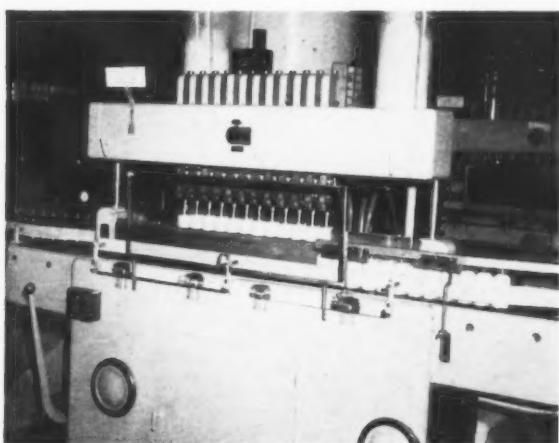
Illustrated is the 12 station machine. Containers from a chute are fed by a star wheel onto turrets. As the upper part of the machine rotates, cams lift the turrets and containers against the rubber seal of the filling head. This contact opens the valve sleeve. As the material flows into the container from the filler bowl, air escapes through a tube in the middle of the valve assembly. Flow stops automatically when product level in the container reaches the mouth of the valve sleeve. The valve is then closed as the turret drops, and containers are discharged onto a conveyor. Product level is maintained in the filler bowl by means of a float valve. Changes in container heights are made by screw adjustment. The machine can be changed for different diameter containers in a few minutes with change parts. The amount of fill at each station can be adjusted by raising or lowering the displacement plate in relation to the valve sleeve.
